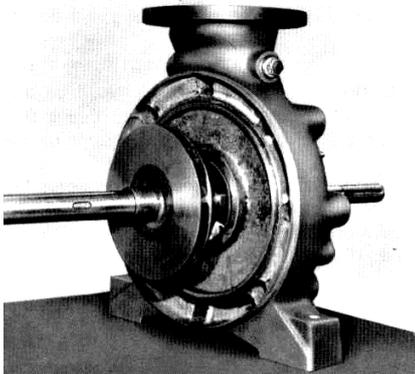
Shaft with first stage impeller inserted into suction casing
